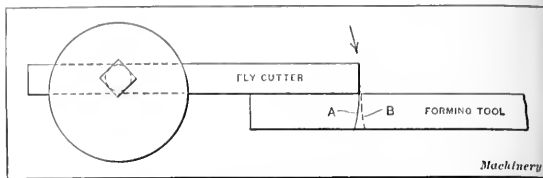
Shape of Tool produced by Fly Cutter and Shape required for Clearance
